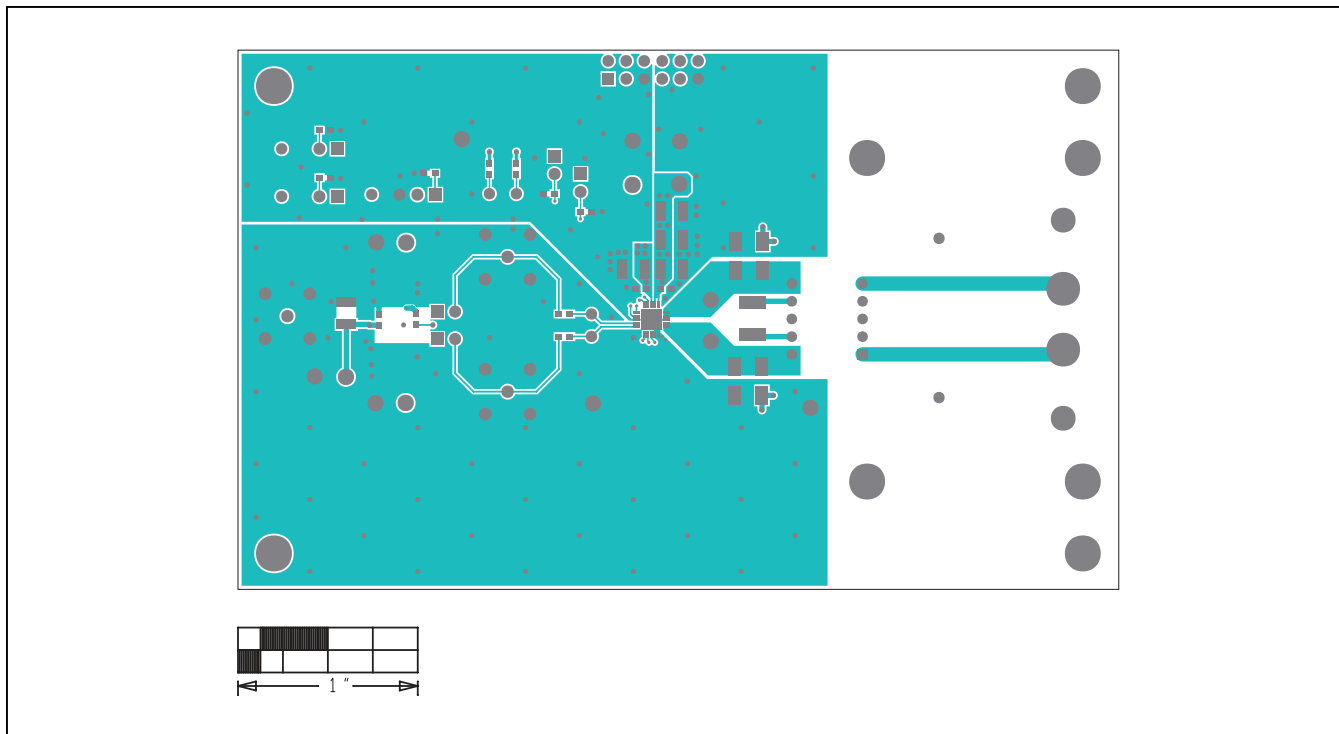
MAX44211 EV Kit PCB Layout—Component Side
